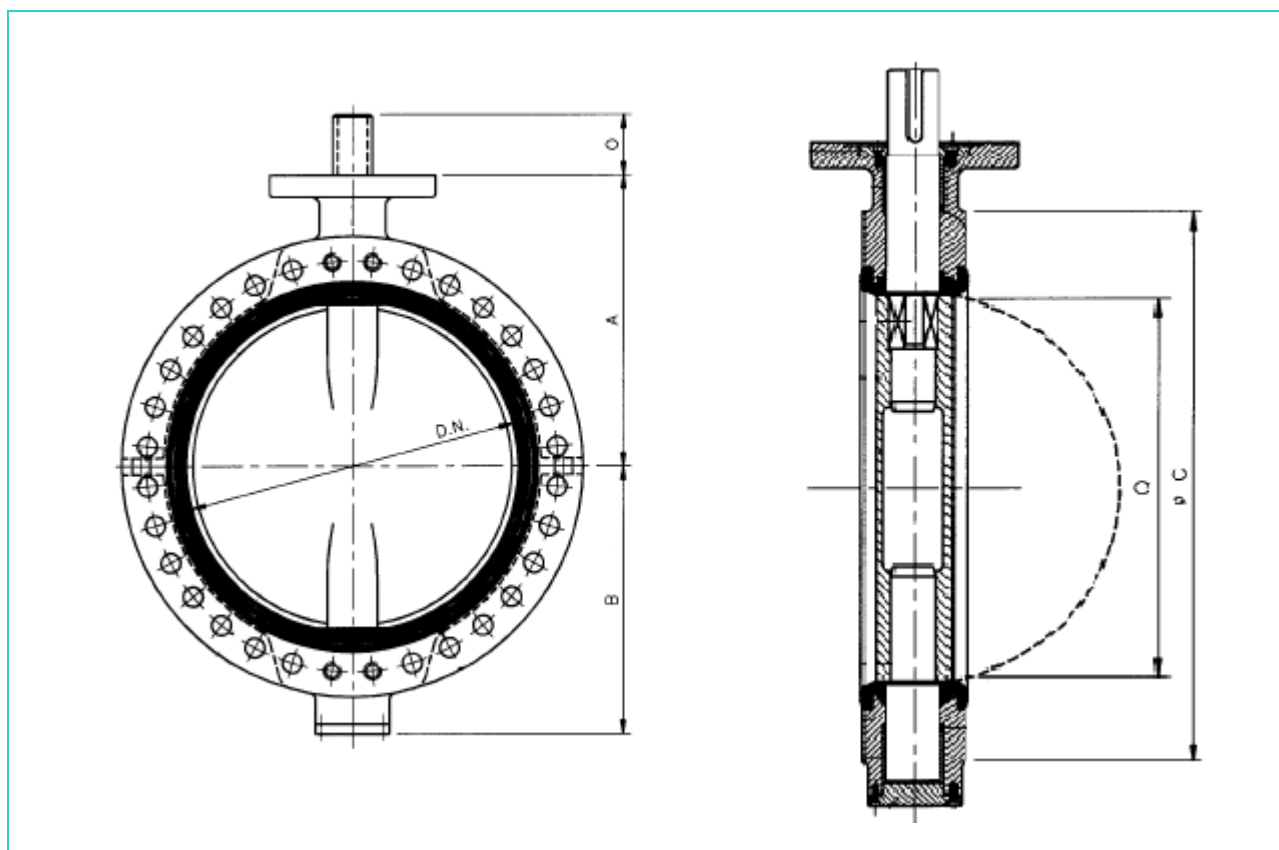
Butterfly Valve – API 609 – LUG type
